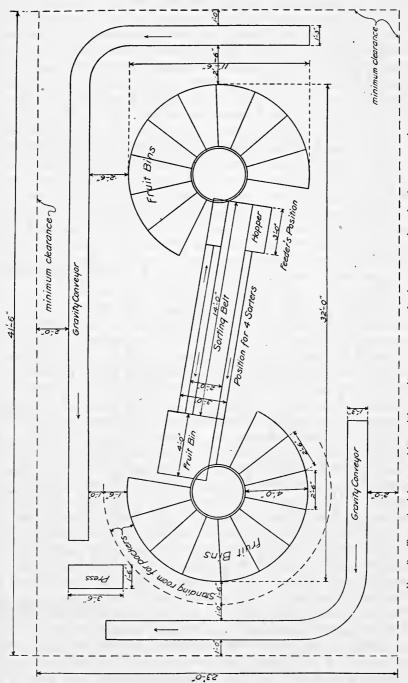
Type A sizing machine with gravity conveyor and other accessories, showing proper clearance.
